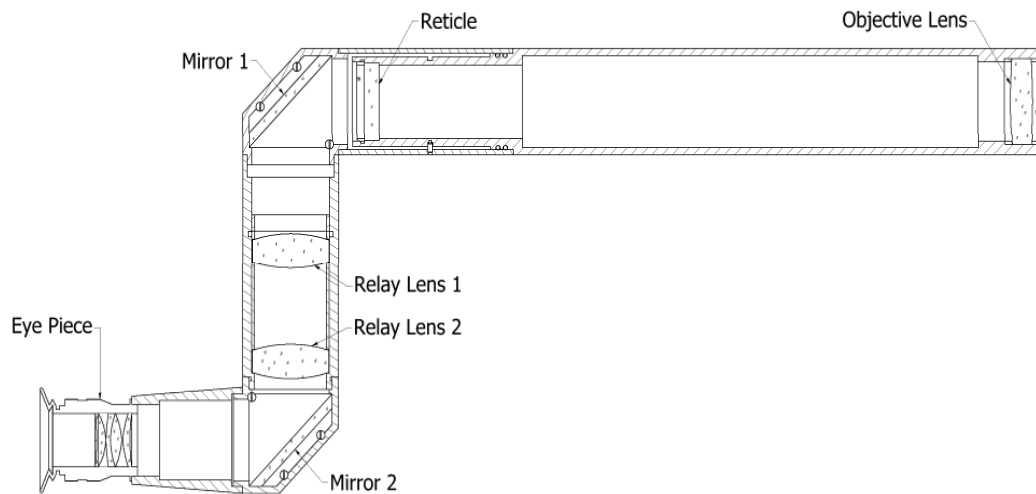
Cross-sectional View of Opto-mechanical Assembly of Telescope
